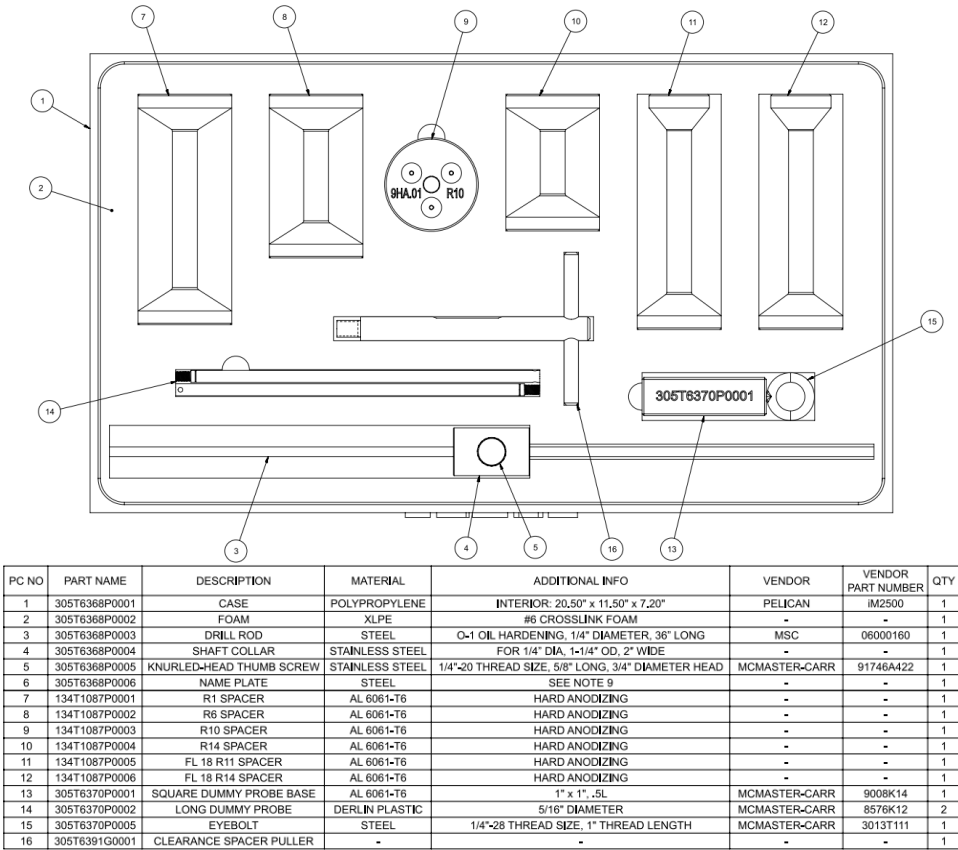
305T6368 9HA.01 Rotor Clearance measurement kit
